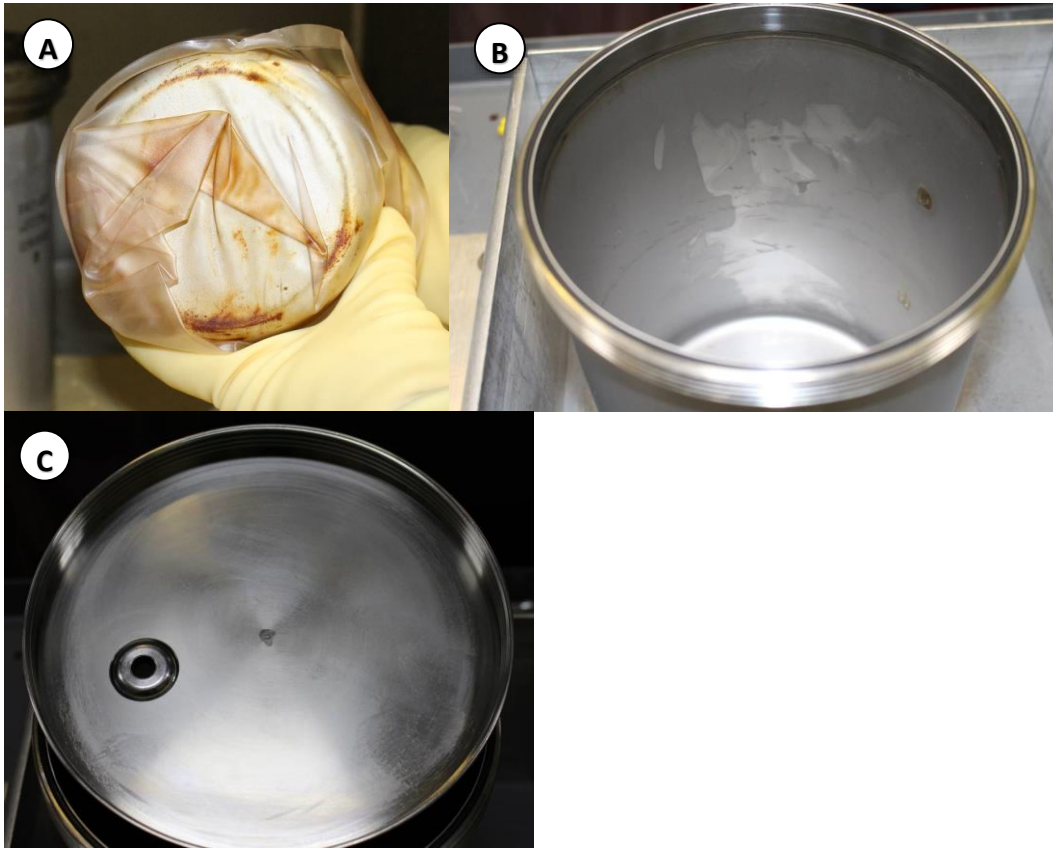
Visual Inspection for 20H11 shows relatively pristine Hagan. (A) Corrosion seen on exterior surface of inner slip-lid container. (B) Inside of Hagan and installed O-ring. (C) Inside of lid and sealing surface.
